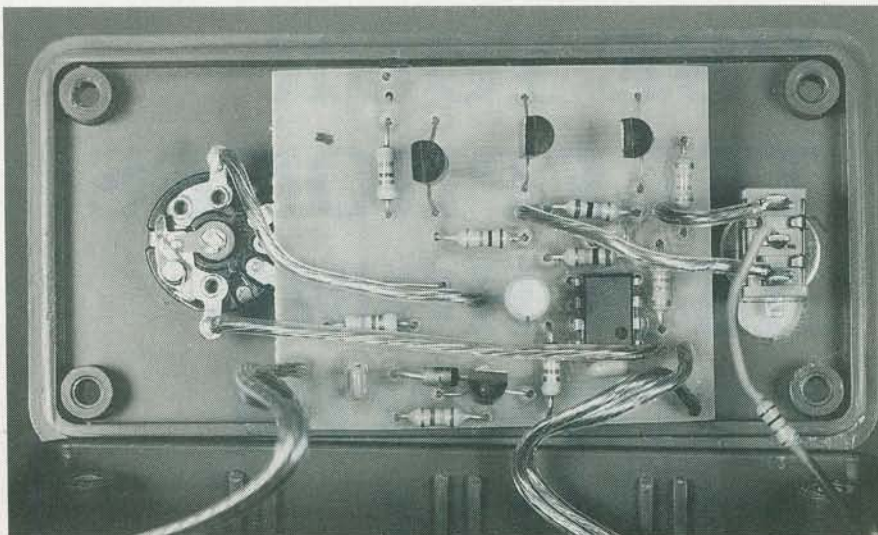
IT'S A TIGHT FIT, but you end up with a neat little handheld instrument. Notice how LED1 is mounted on the foil side of the board and protrudes through the front panel.
